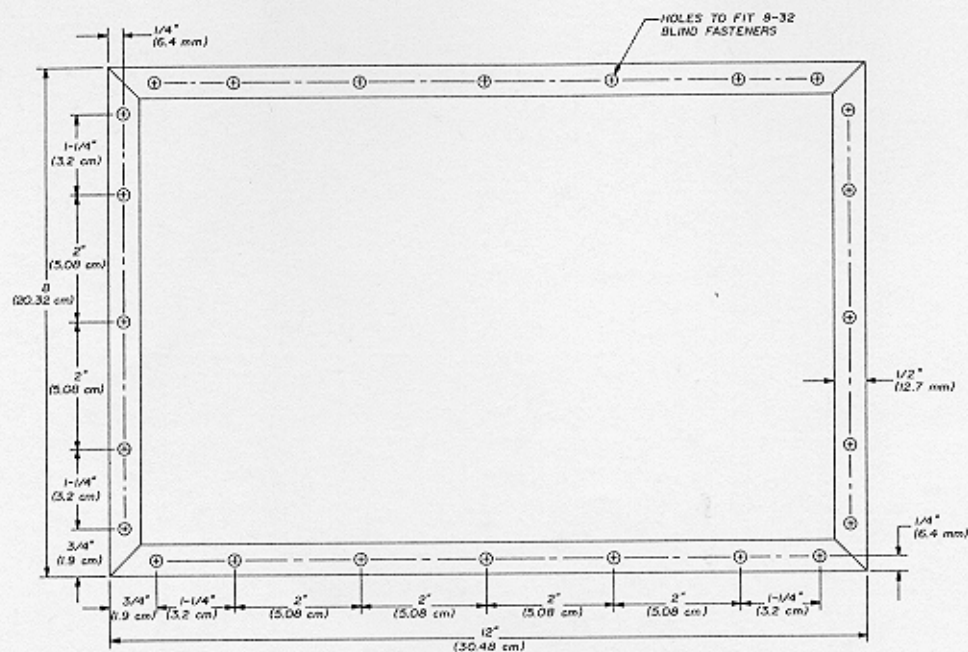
Bottom view of the lower chassis for the two-meter kilowatt.
